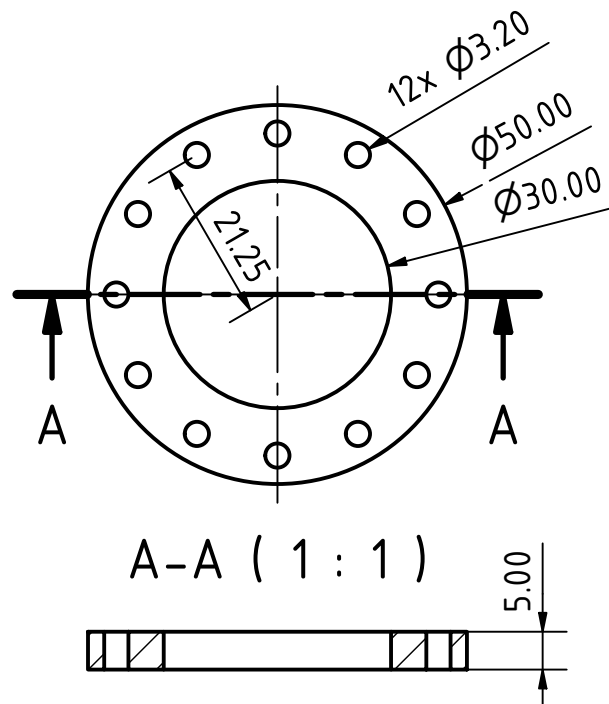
Technical drawing of the cover of the integrated valve system: top view (top) and section view (bottom) with scale 1:1. All dimensions in mm.
